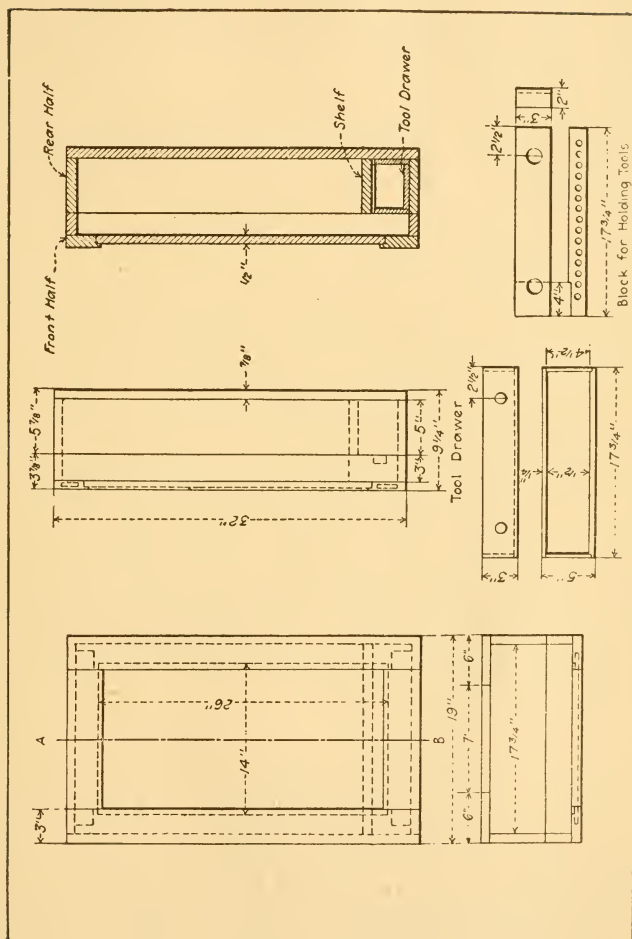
Working Drawings for Building a Practical Tool Cabinet.
